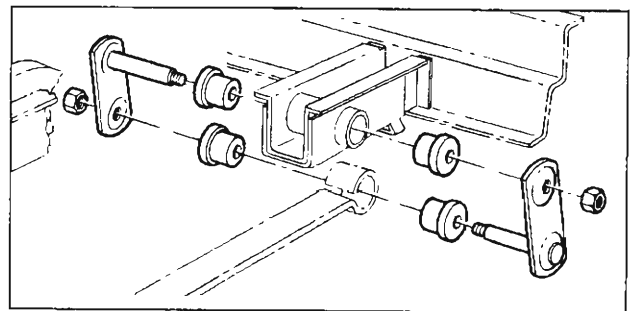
Rear Spring Shackle Exploded View—All Except Station Wagon
